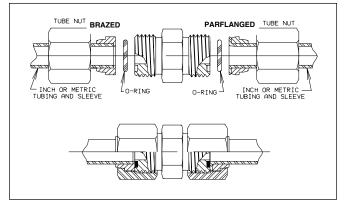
Flange and Braze Style Seal-Lok Fitting Components and Assembly.
